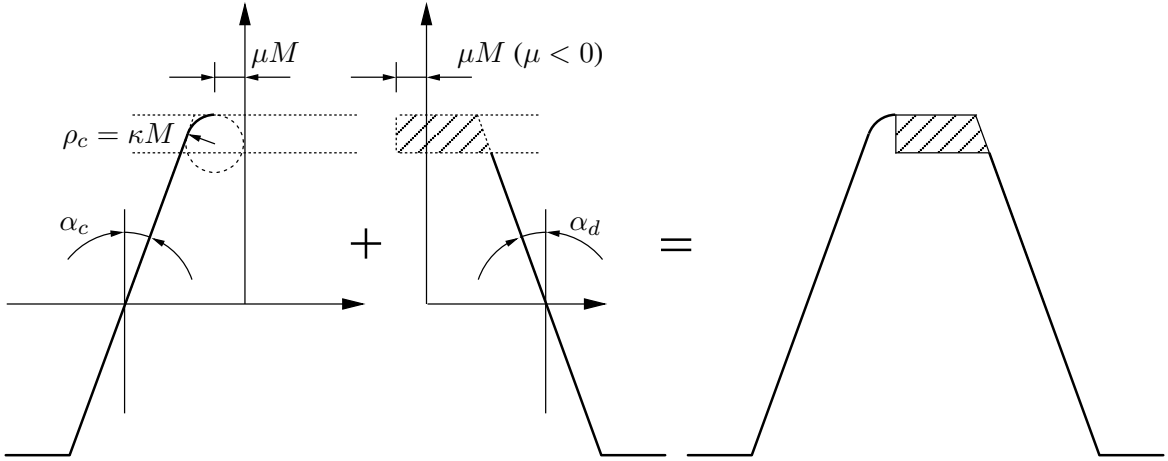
The design domain for the optimization shown as the hatched part. The coast side pressure angle and drive side pressure angle is shown together with the circle radius on the cutting tool coast side.
